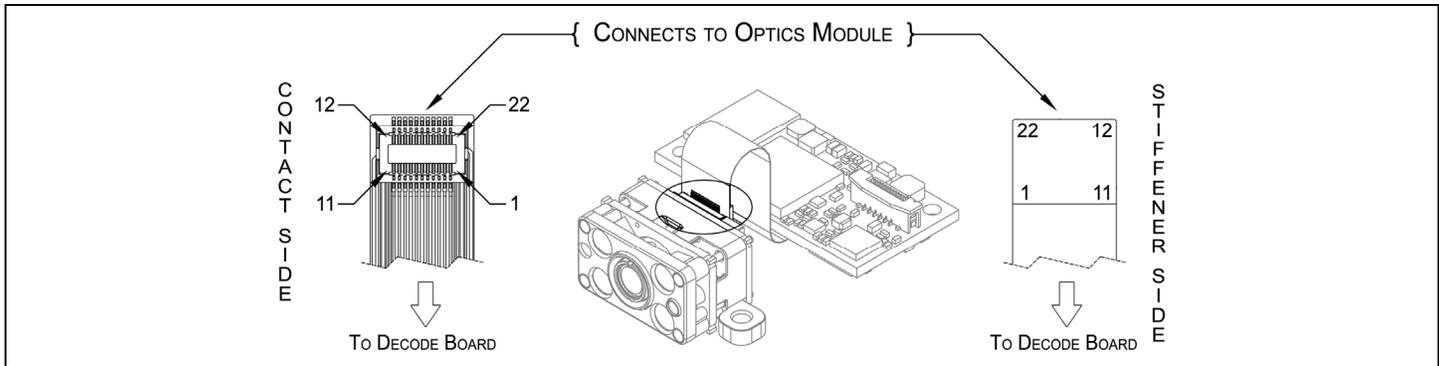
Flex Cable Pinout (Imaging Engine Connector End)
